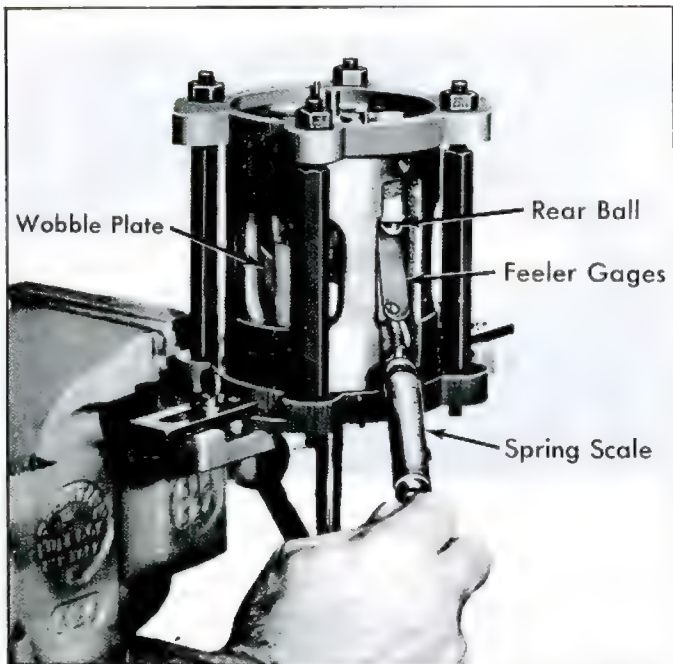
Checking Clearance Between Rear Ball and Wobble Plate
